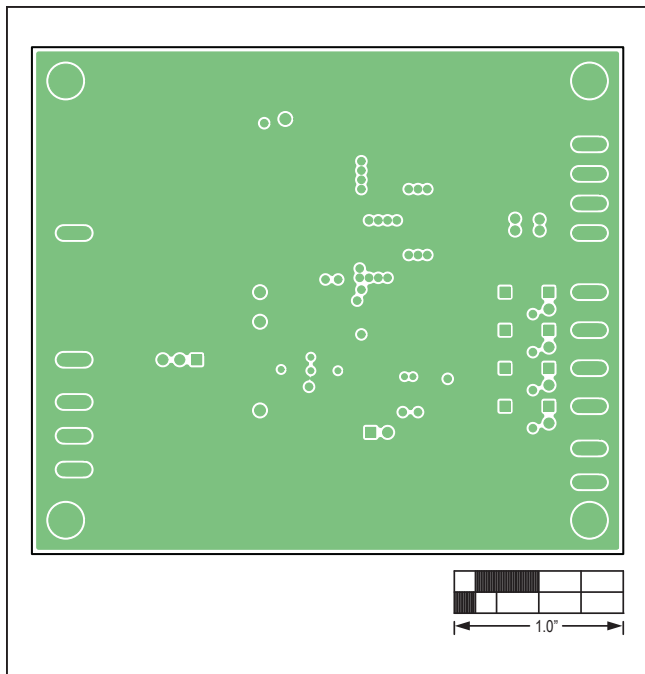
MAX16813 EV Kit PCB Layout—PGND Layer 3
